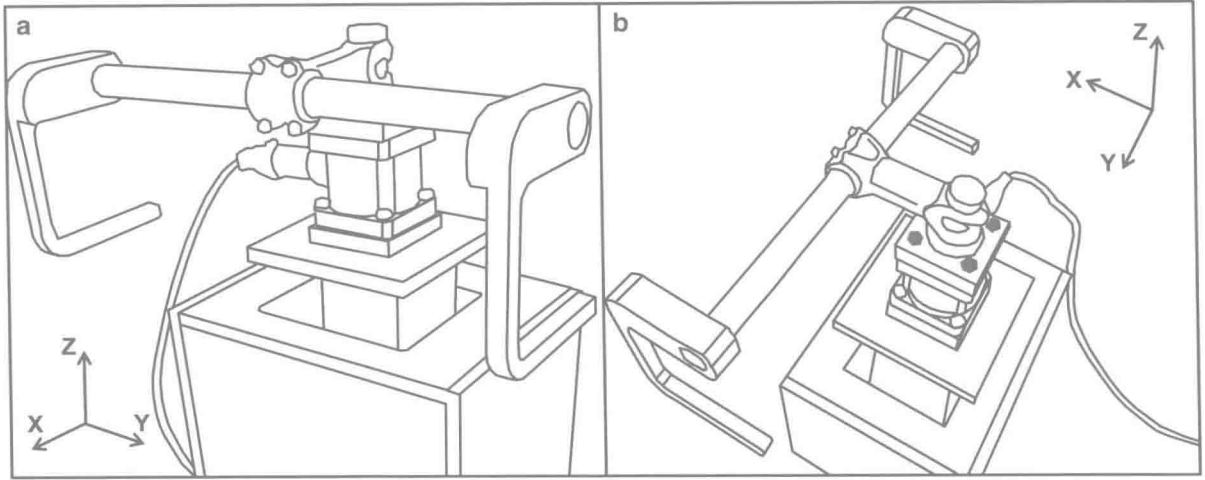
Mechanical assembly with the 6DOFs forces/moments sensor installed on the excitation device. (a) Front view, (b) Top view
